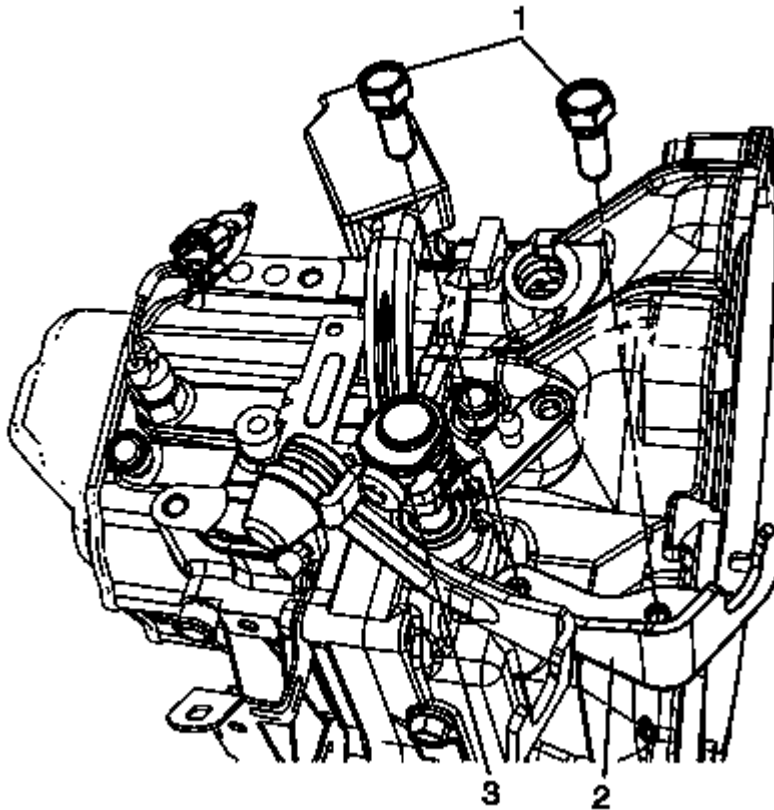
Selector And Shift Lever Cable Bracket Bolts
